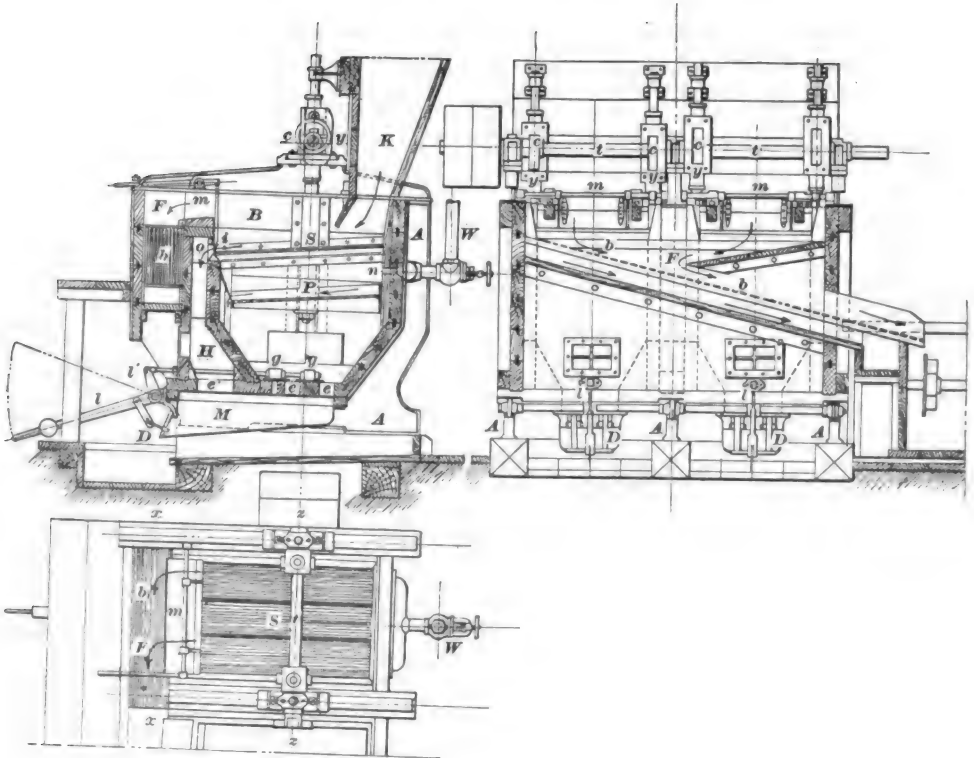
STUTZ IMPROVED COAL JIGGING AND WASHING MACHINE.
